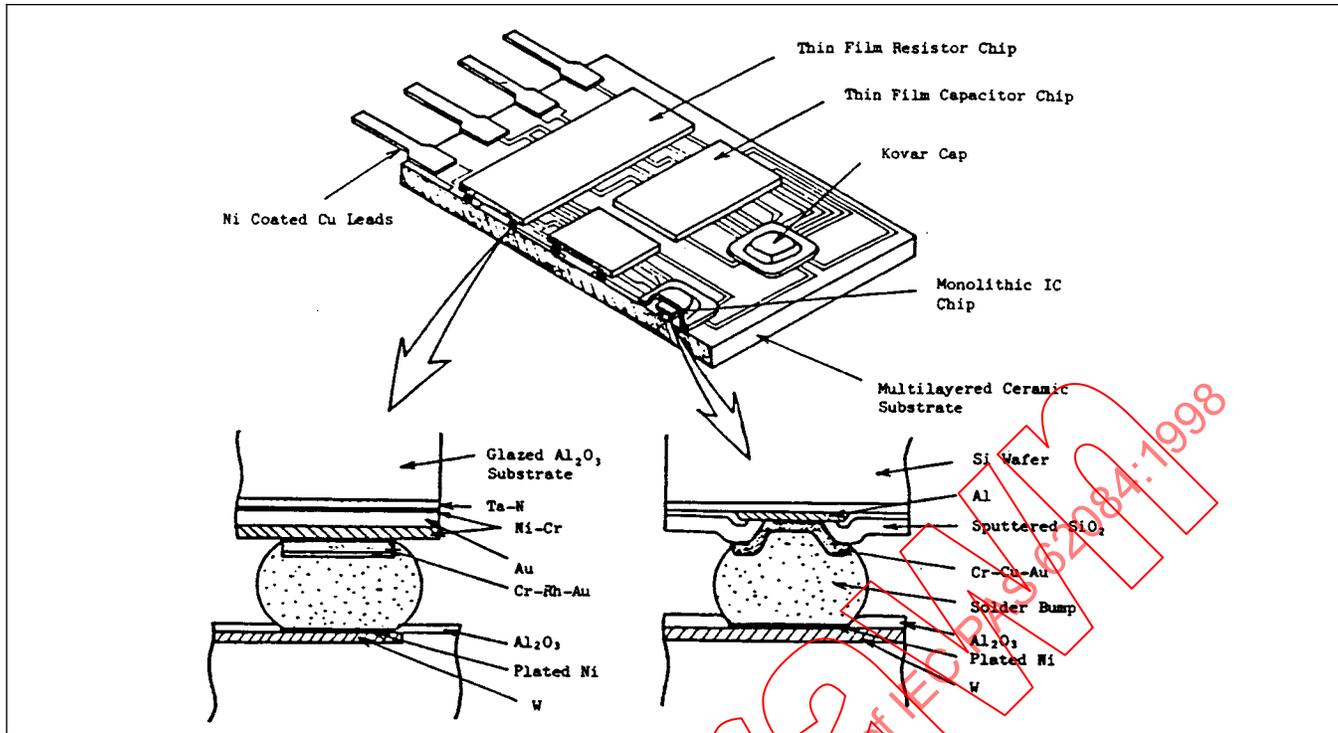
Structure of Hybrid IC Using Solder Bump and Cross-Sections
